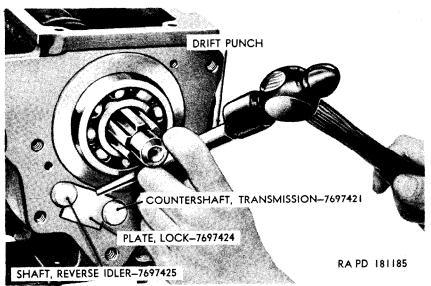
Removing transmission reverse idler shaft and countershaft lock plate.
